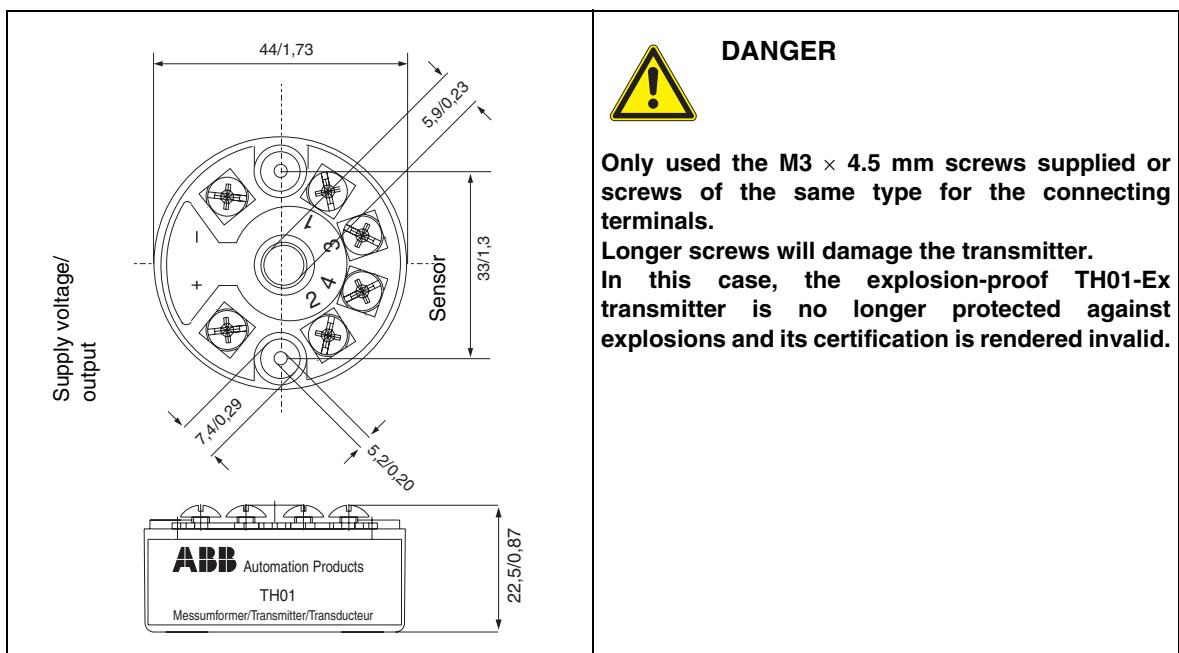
Dimensional drawing of TH01, TH01-Ex transmitter (dimensions in mm/inches)
